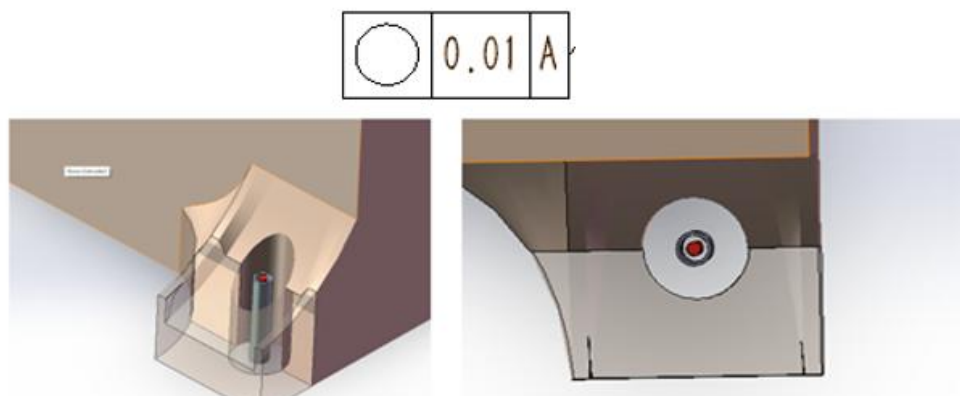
Bottom Mounting Holes tolerance of the midpart
